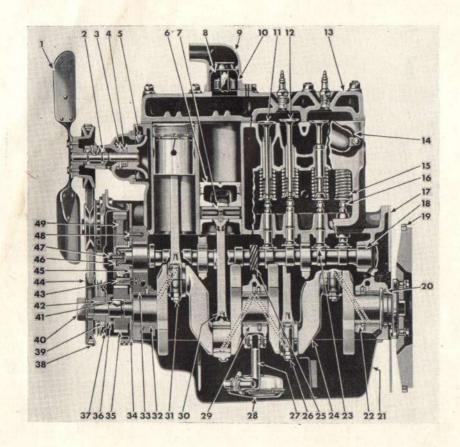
SIDE SECTIONAL VIEW OF ENGINE
